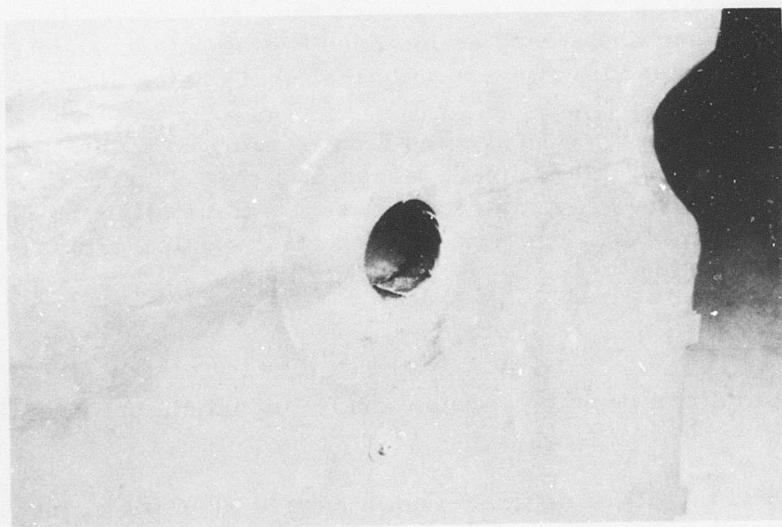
Remains of the Frangible Tank Wall Stabilizer Surrounding the Tank-to-Engine Tank Outlet.
